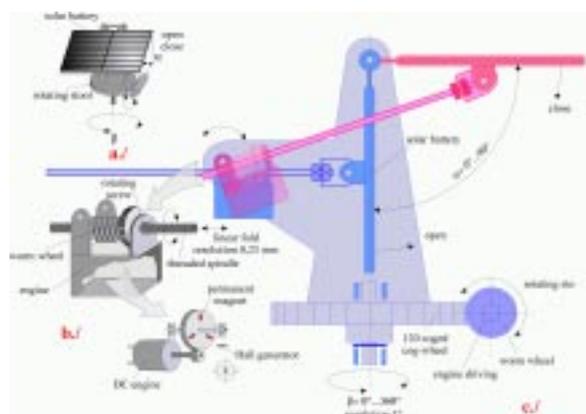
Mechanical arrangement of the solar panel of Hunveyor-2 with the driving motors.
